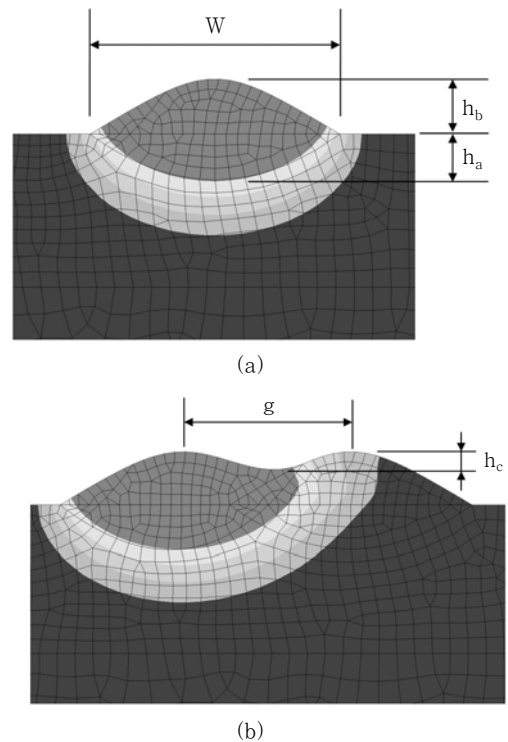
Geometric parameters to configure overlapped bead in SYSWELD analysis : (a) 1st pass 1st-turn, (b) 1st pass 2nd-turn
